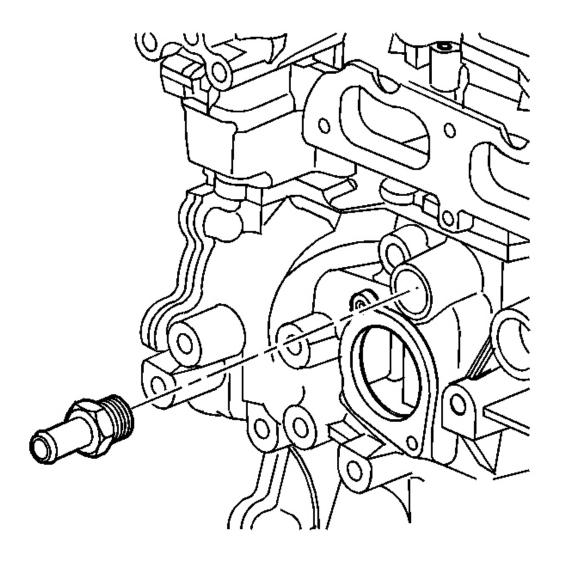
View Of Heater Outlet Hose Fitting Courtesy of GENERAL MOTORS CORP.
